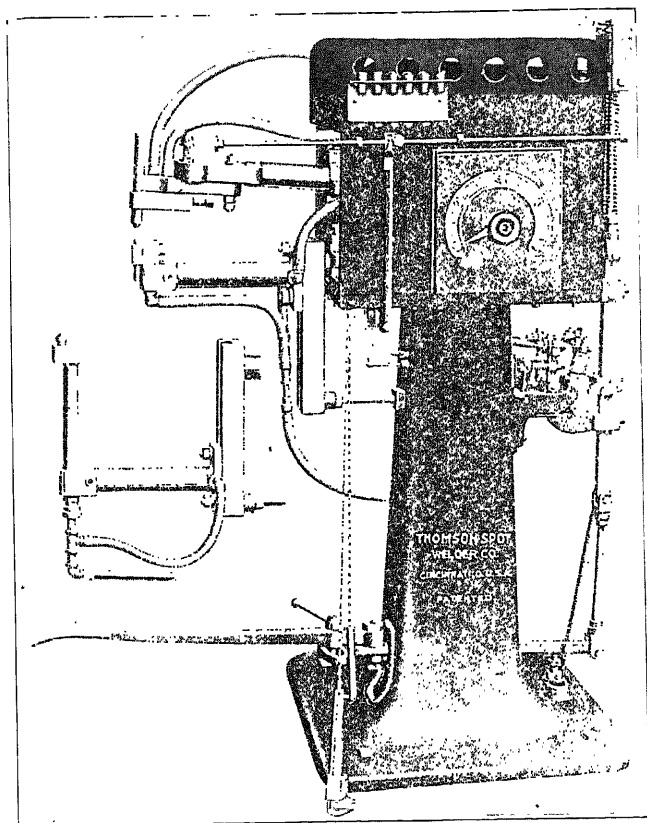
The Thomson Light Manufacturing Type Spot-Welding Machine.
